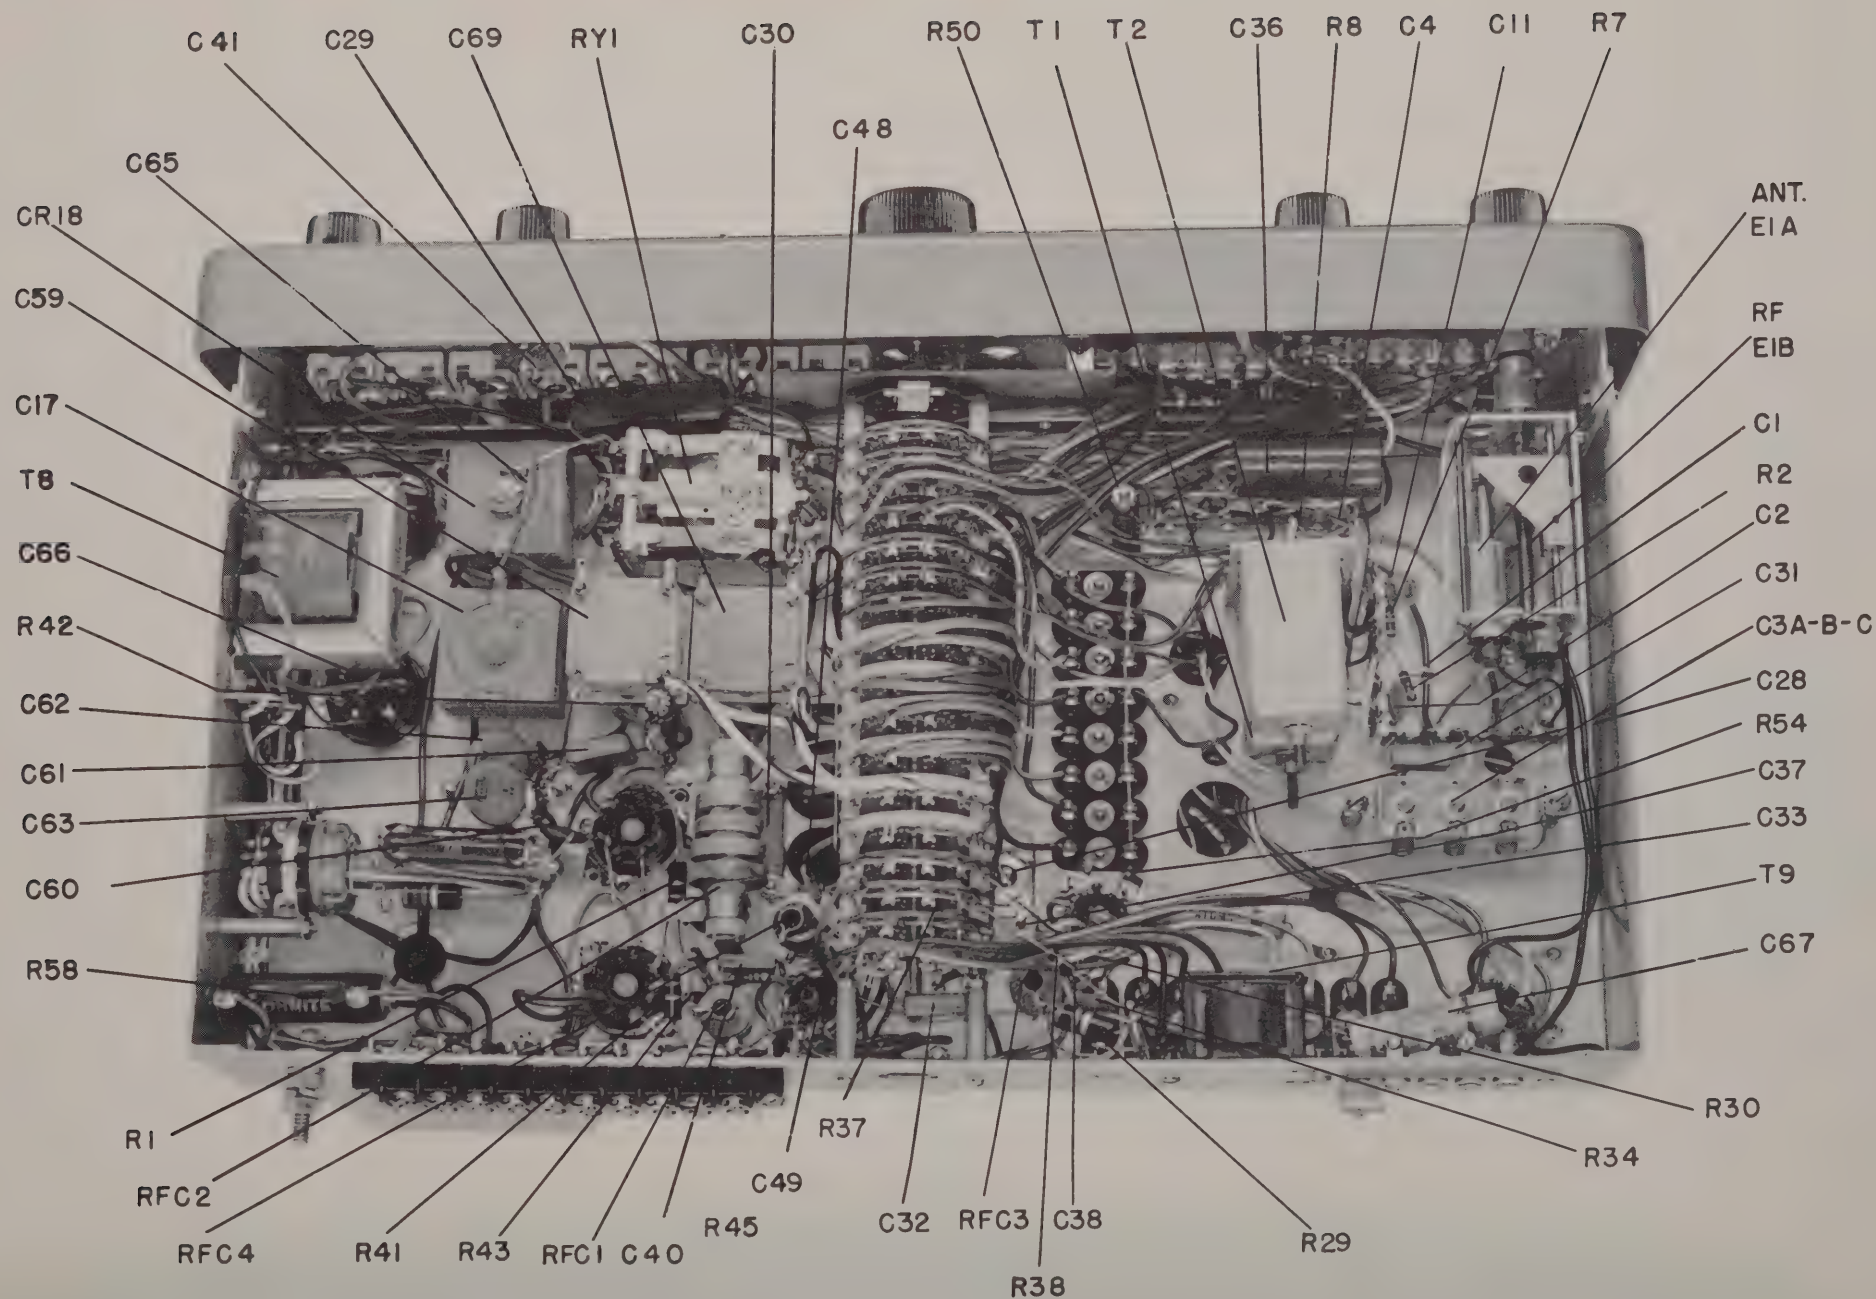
SKIPPER CUSTOM "120" BOTTOM VIEW
